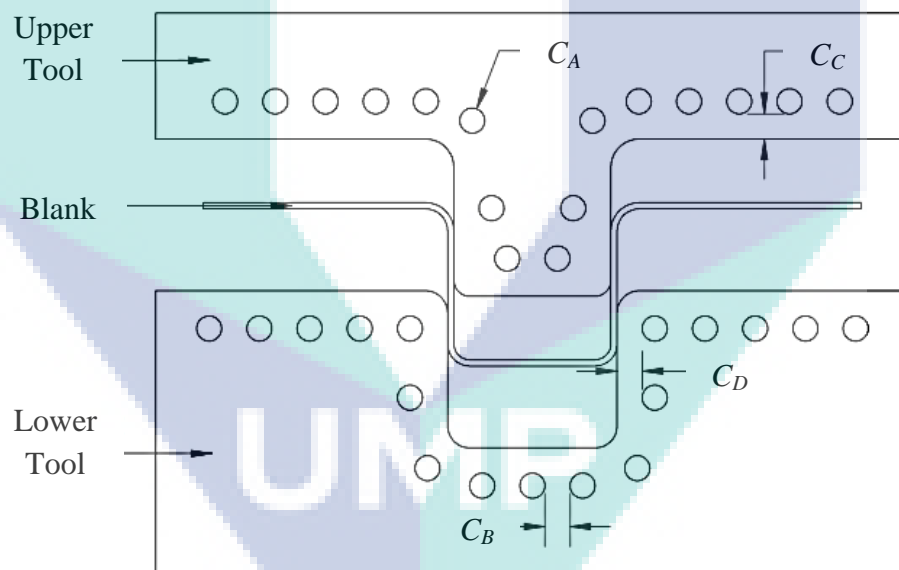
U-shape hot stamping tool with cooling channel parameter
